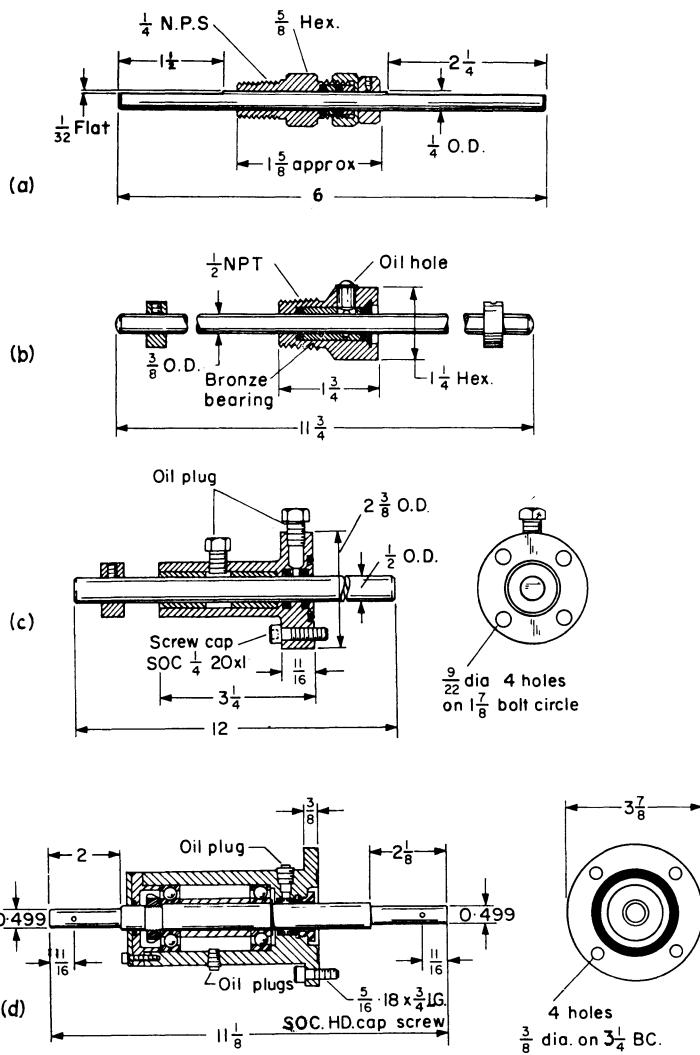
Dimensions of shaft seals supplied by C.V.C.²³¹ (Table 5.10)
